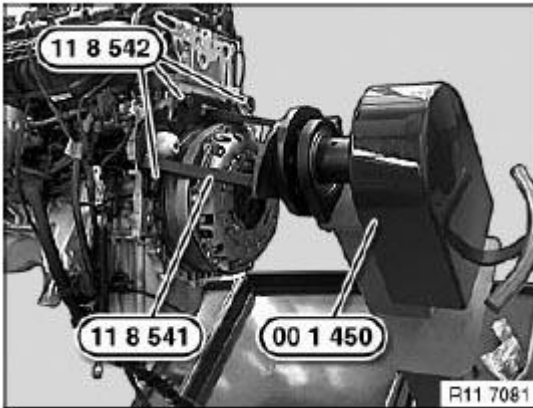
Mounting Engine Or Engine Block With Special Tool (11 8 542) To (11 8 541)
